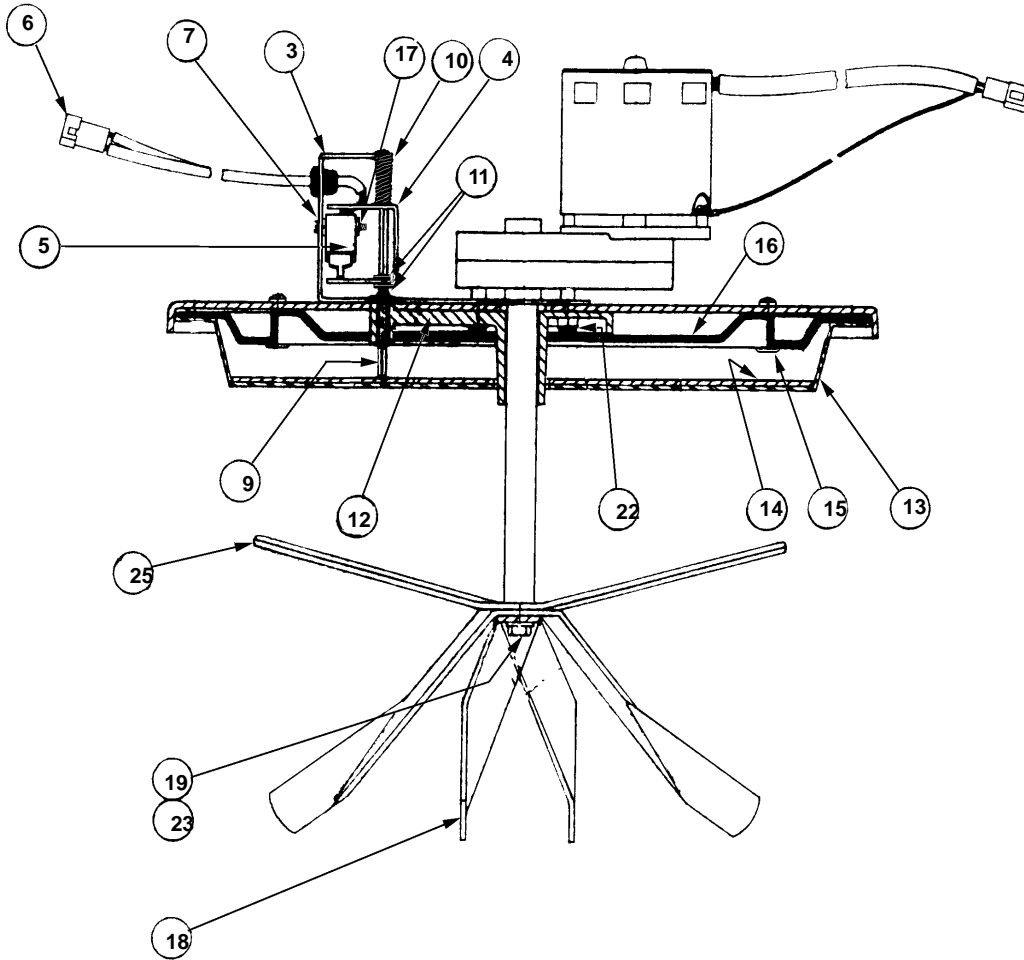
SIDE VIEW ICE LEVEL CONTROL ASSEMBLY
